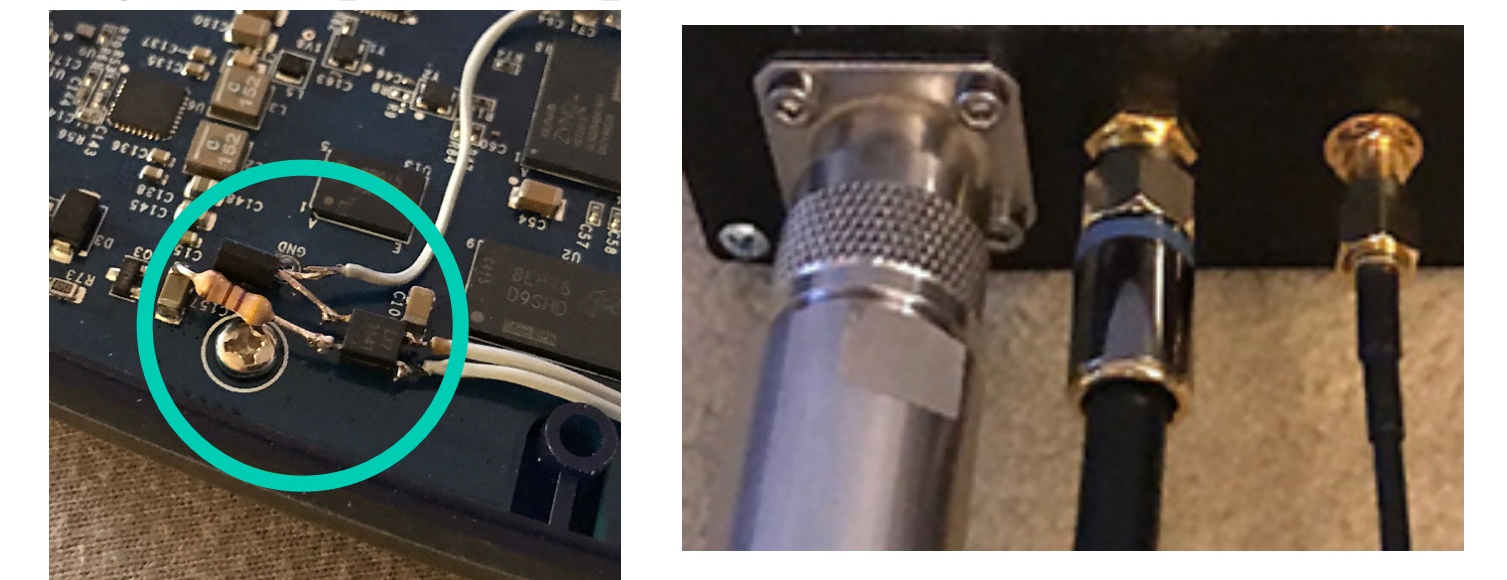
Soldered SDR example trigger pin connection (left); example prototype I/O (right)
